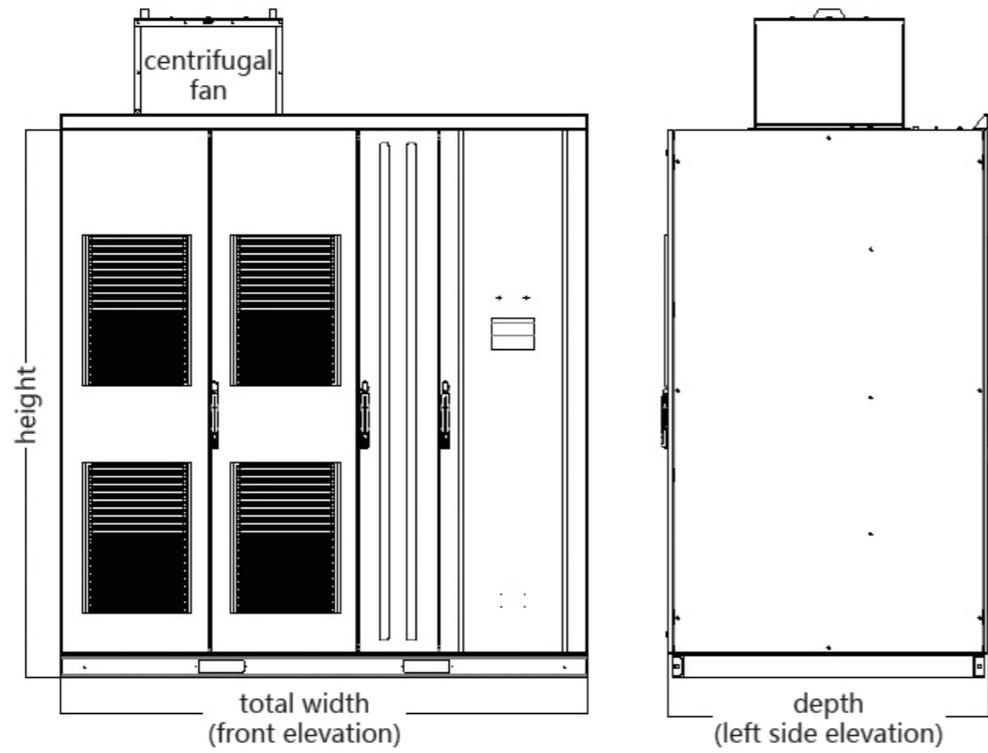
Dimensional Drawing of G40-10kV-Indoor-Air Cooling FGSVG-C2.0/10
